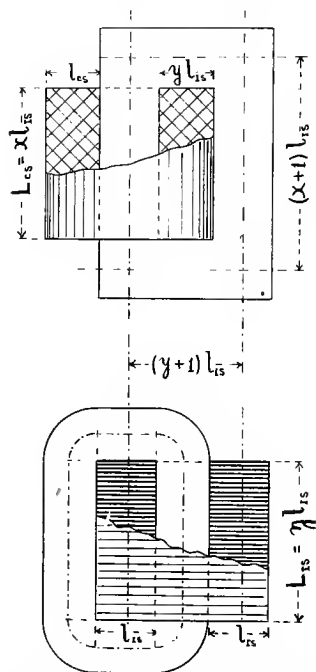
Simple Transformer with Rectangular Coils.
